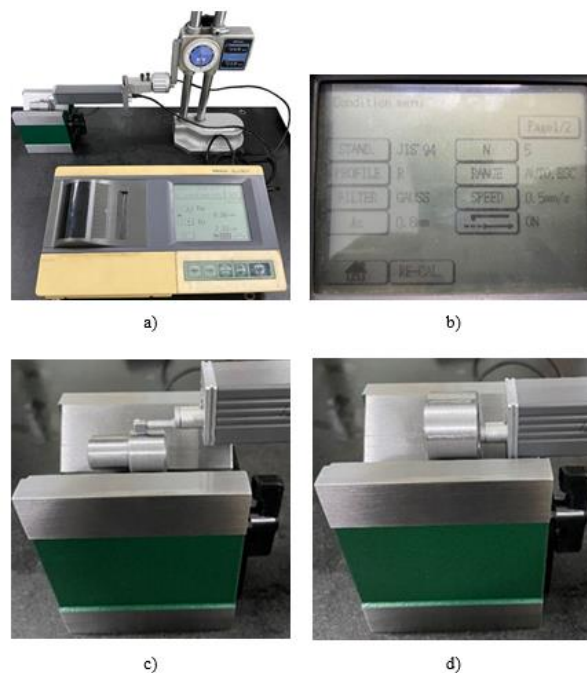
Surface roughness inspection on (a) Mitutoyo SJ-301 surface profiler with common (b) input conditions for (c) shaft and (d) hub specimens
